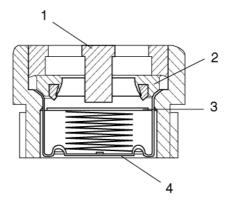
Sectional view of the auxiliary air valve, for legend see Table 9
